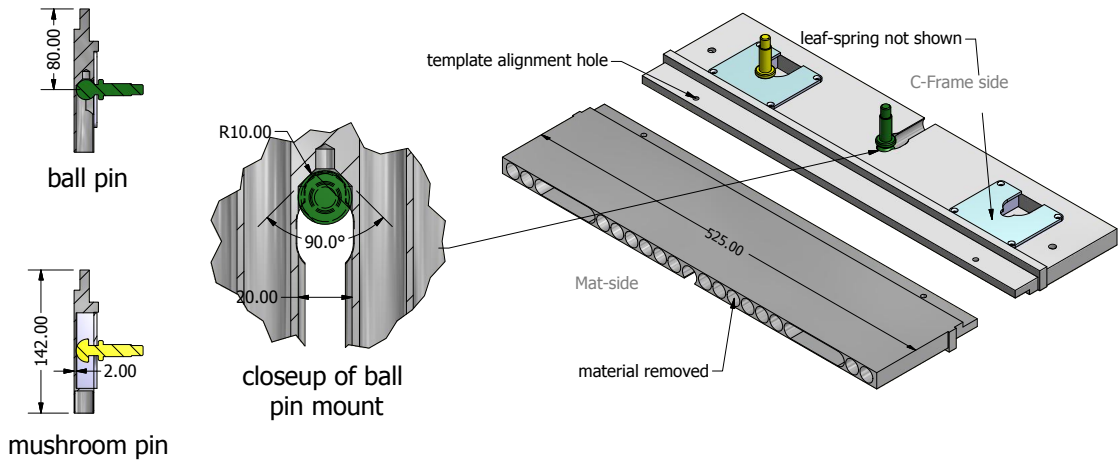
An illustrative drawing of the C-Frame mounting endplug. Construction drawings can be found on EDMS.
